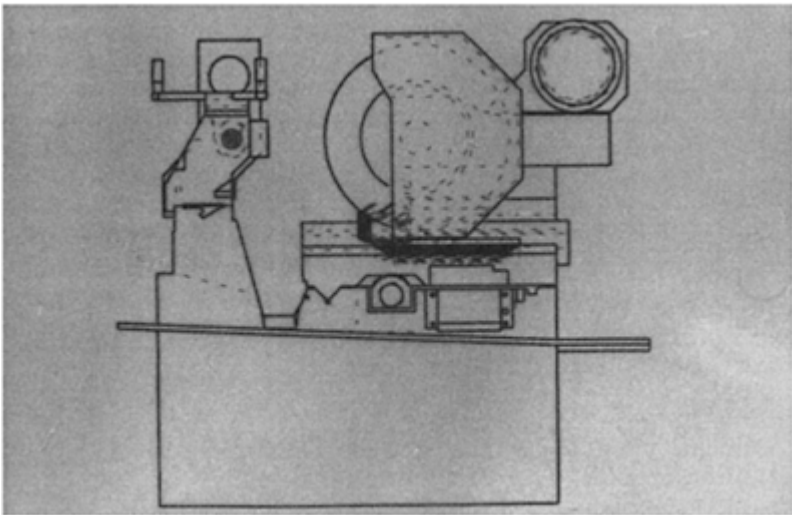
Draft of the CNC circular grinding machine used for the videosomatography (side view without machine housing)
